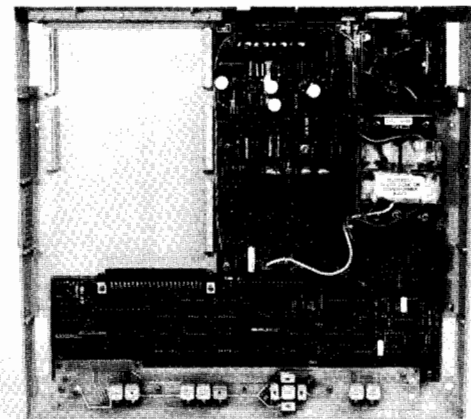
Top Cover and Deck Assemblies Identification/Removal
